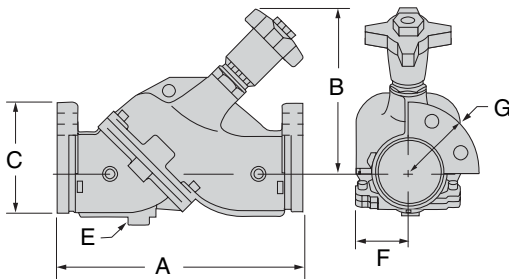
FIGURE GBV-G GROOVED-END STRAIGHT BALANCING VALVES DUCTILE IRON, GROOVED-END OR FLANGED-END STRAIGHT
